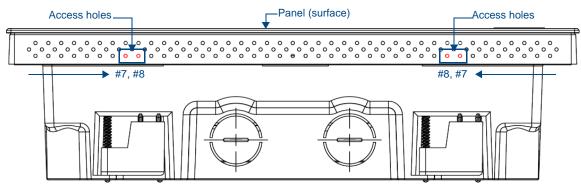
Bottom View (Landscape) or Right-Side View (Portrait) of the MXD-1001 showing access holes in molding
